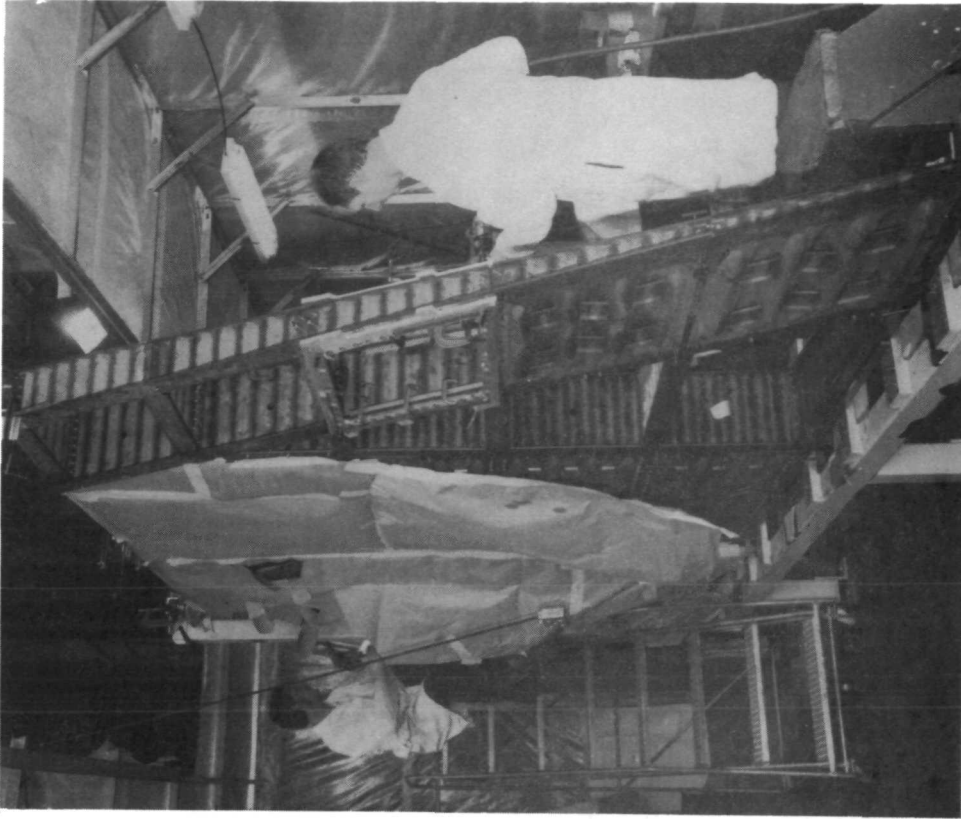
Operator Drilling Mounting Holes (Separate drill plates used for top and bottom sides of the wing; leading edge view.)
